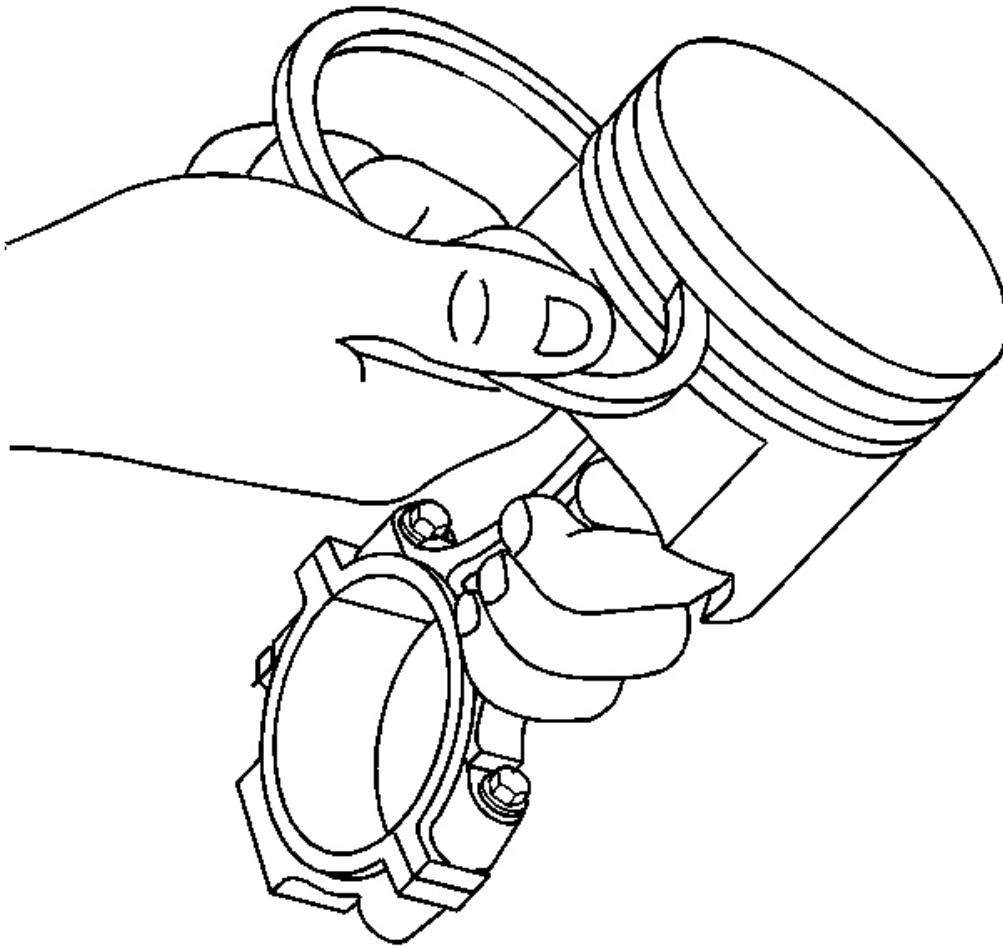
Measuring Piston Ring To Piston Ring Groove Side Clearance
